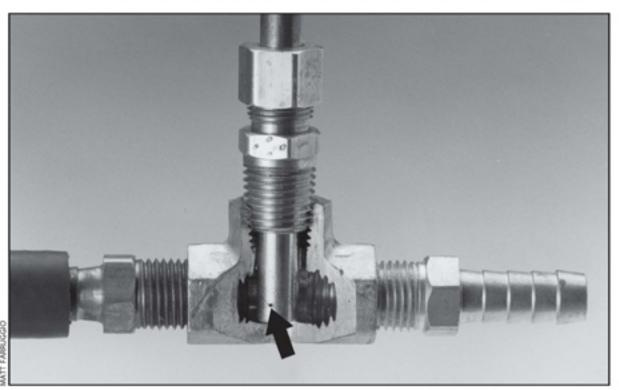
Cutaway model of PCV-type cold-start fuel injector. This model is intentionally oversized to illustrate its construction. The tube should be 1/8 inch with the end soldered and drilled with a tiny hole (the same way this 5/16-inch line has been constructed). The hole would actually point to the left, in the direction of the airflow, and the compression fitting would be a Vo-inch mip × Vo-inch compression adapter. Hose barbs should be 3/0 inch for most PCV lines.
